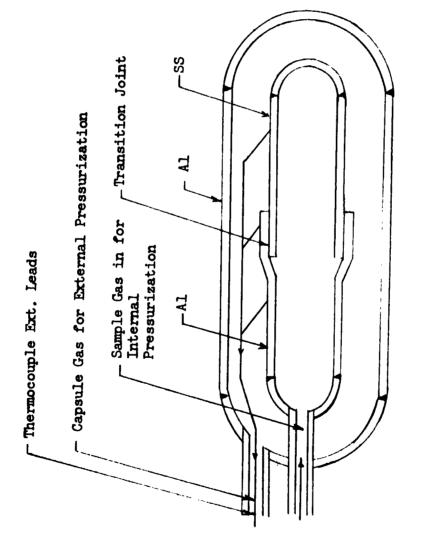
Sketch of Aluminum - Stainless Steel Test Fixture
